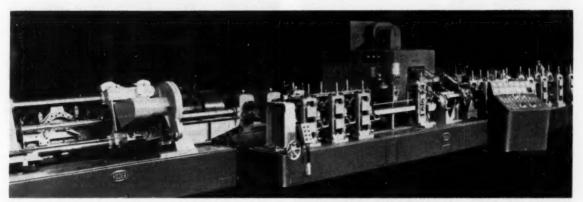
Yoder tube mill for high-speed cold-forming, welding, and sizing of nonferrous tubing. View is from exit end of mill, with part of automatic-saw cutoff at extreme left and sizing mill in center. Welder and part of forming mill is at right.
